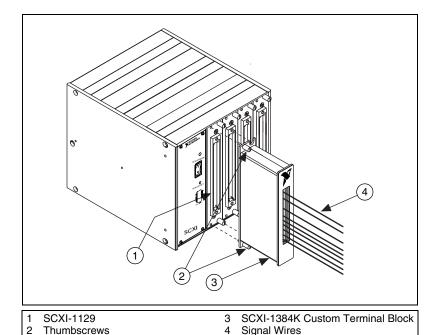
Installing the SCXI-1384K Custom Terminal Block
